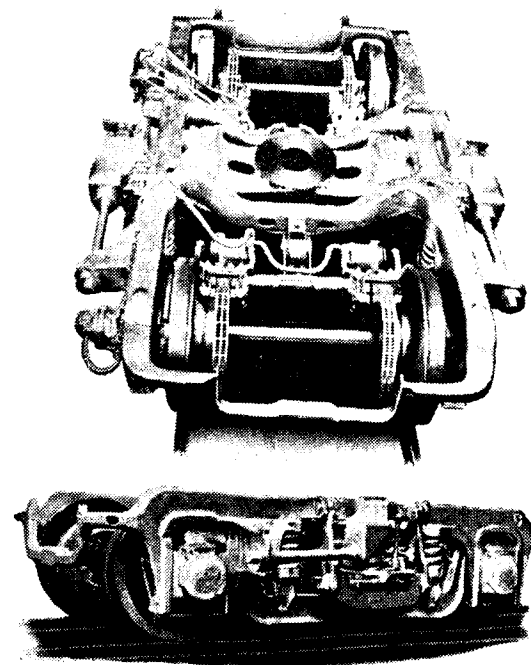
Modern four-wheel passenger truck: off-tread brake shown, tread brake also provided.
